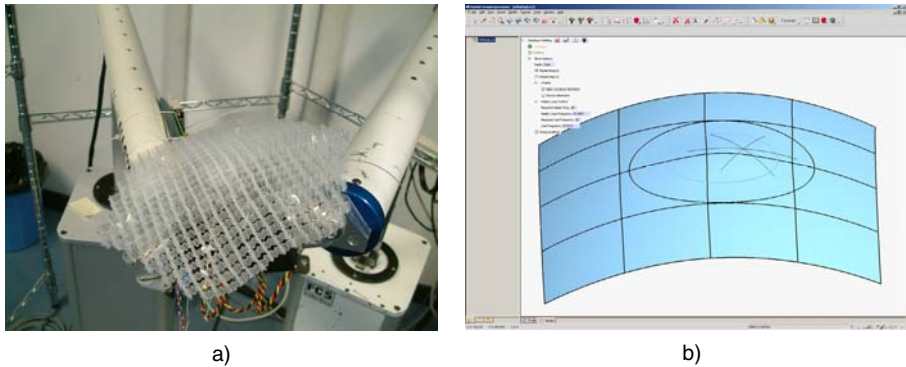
a) Views of the sanding tool device without the cover; b) area explored using the sanding tool
